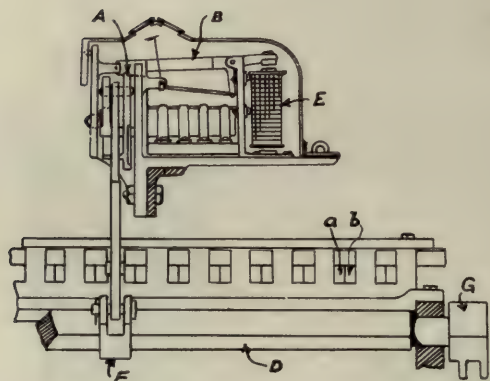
Sectional View of Electric Lock, Fig. 2792. Showing Alternative Method of Attaching to Saxby & Farmer Interlocking Machine.
